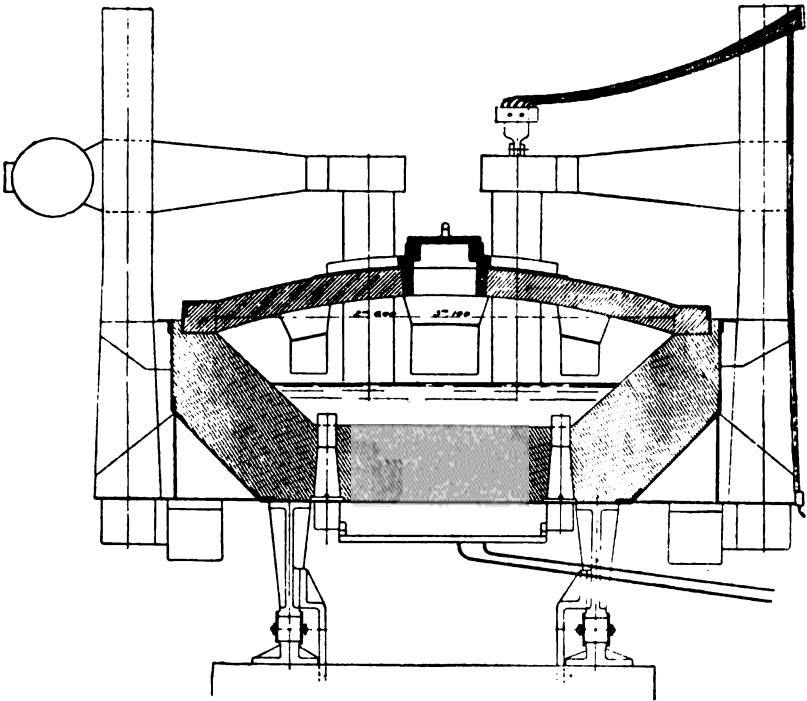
SECTIONAL ELEVATION OF 12-TON GIROD ELECTRIC FURNACE.
